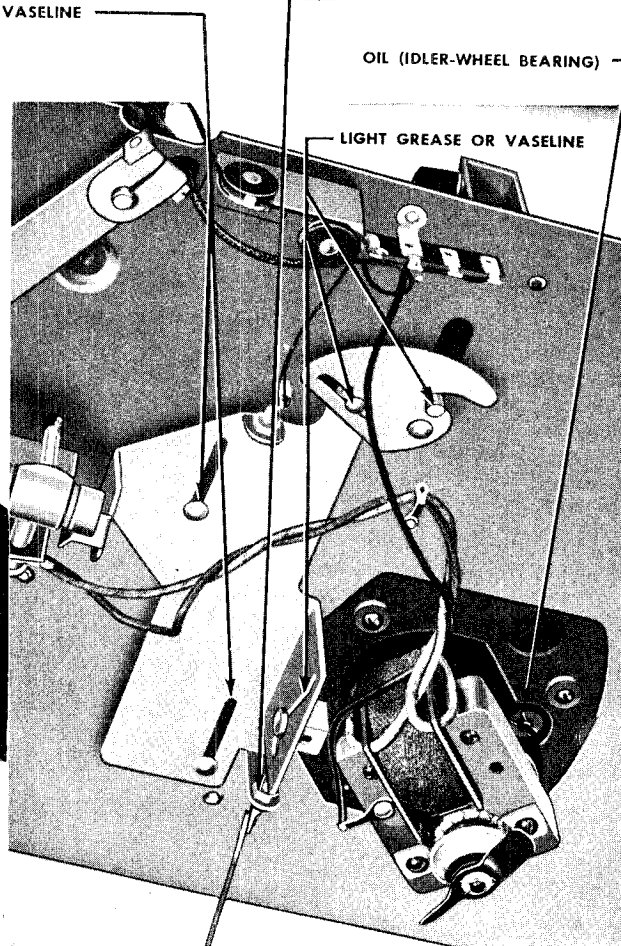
LUBRICATION POINTS UNDER MOTOR BOARD.
